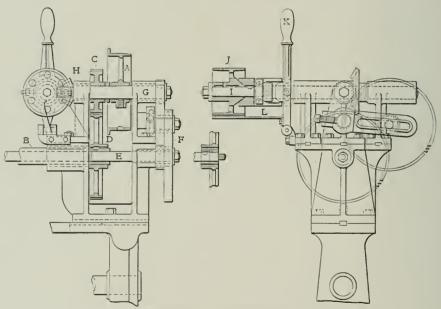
Driving Mechanism of Universal Automatic Screw Machine
